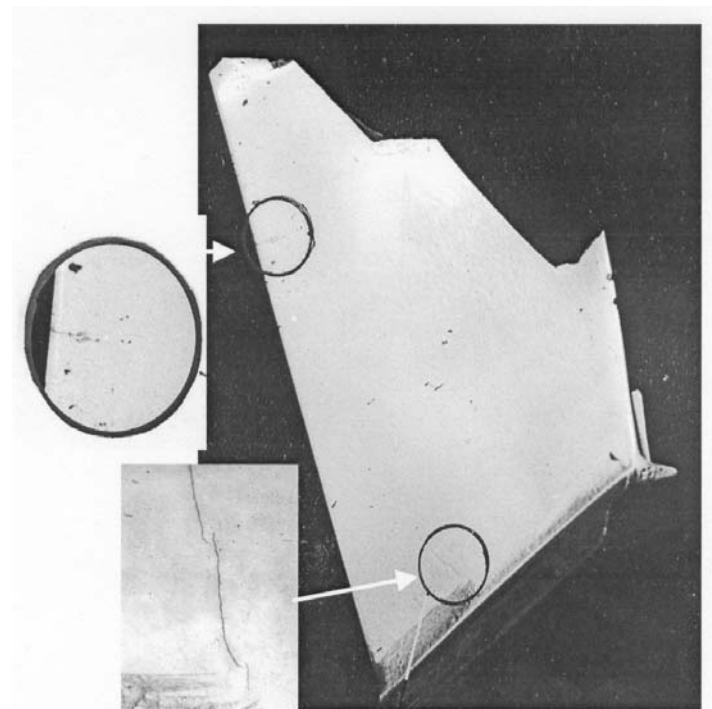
Cracks in other areas of the failed blade. Insets show enlarged areas of some of these cracks.
